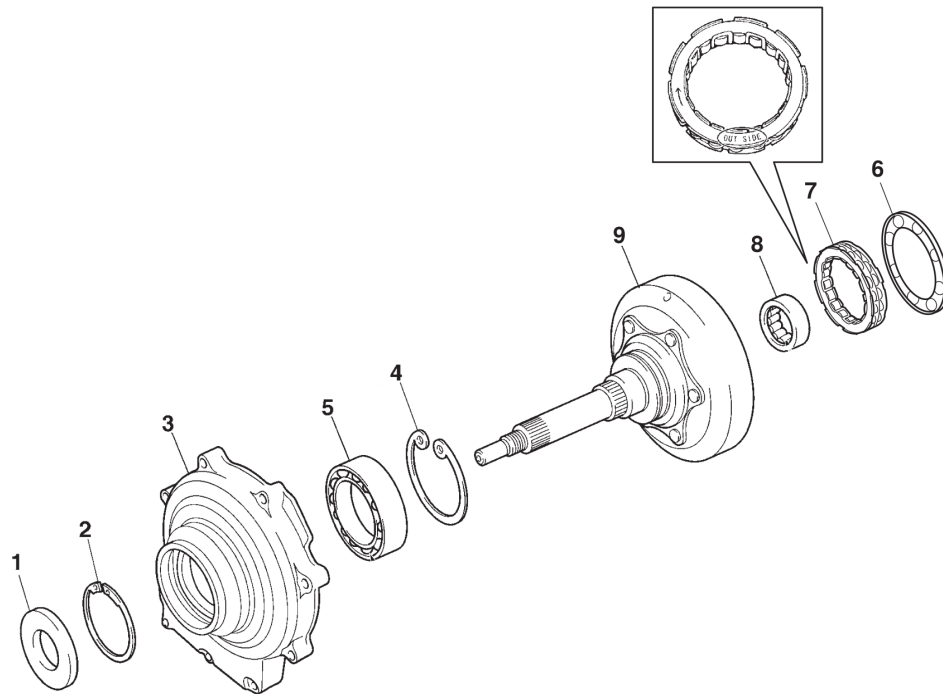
Centrifugal clutch housing internal assembly [10, p. 5-61]
